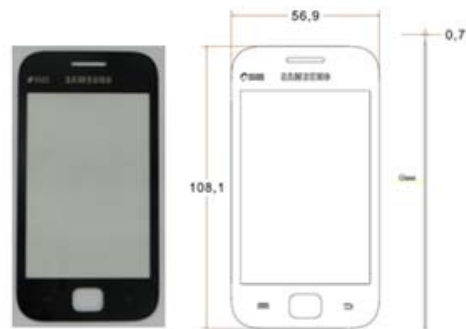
Specimen : Photograph and drawing of GT-S6802 window glass
